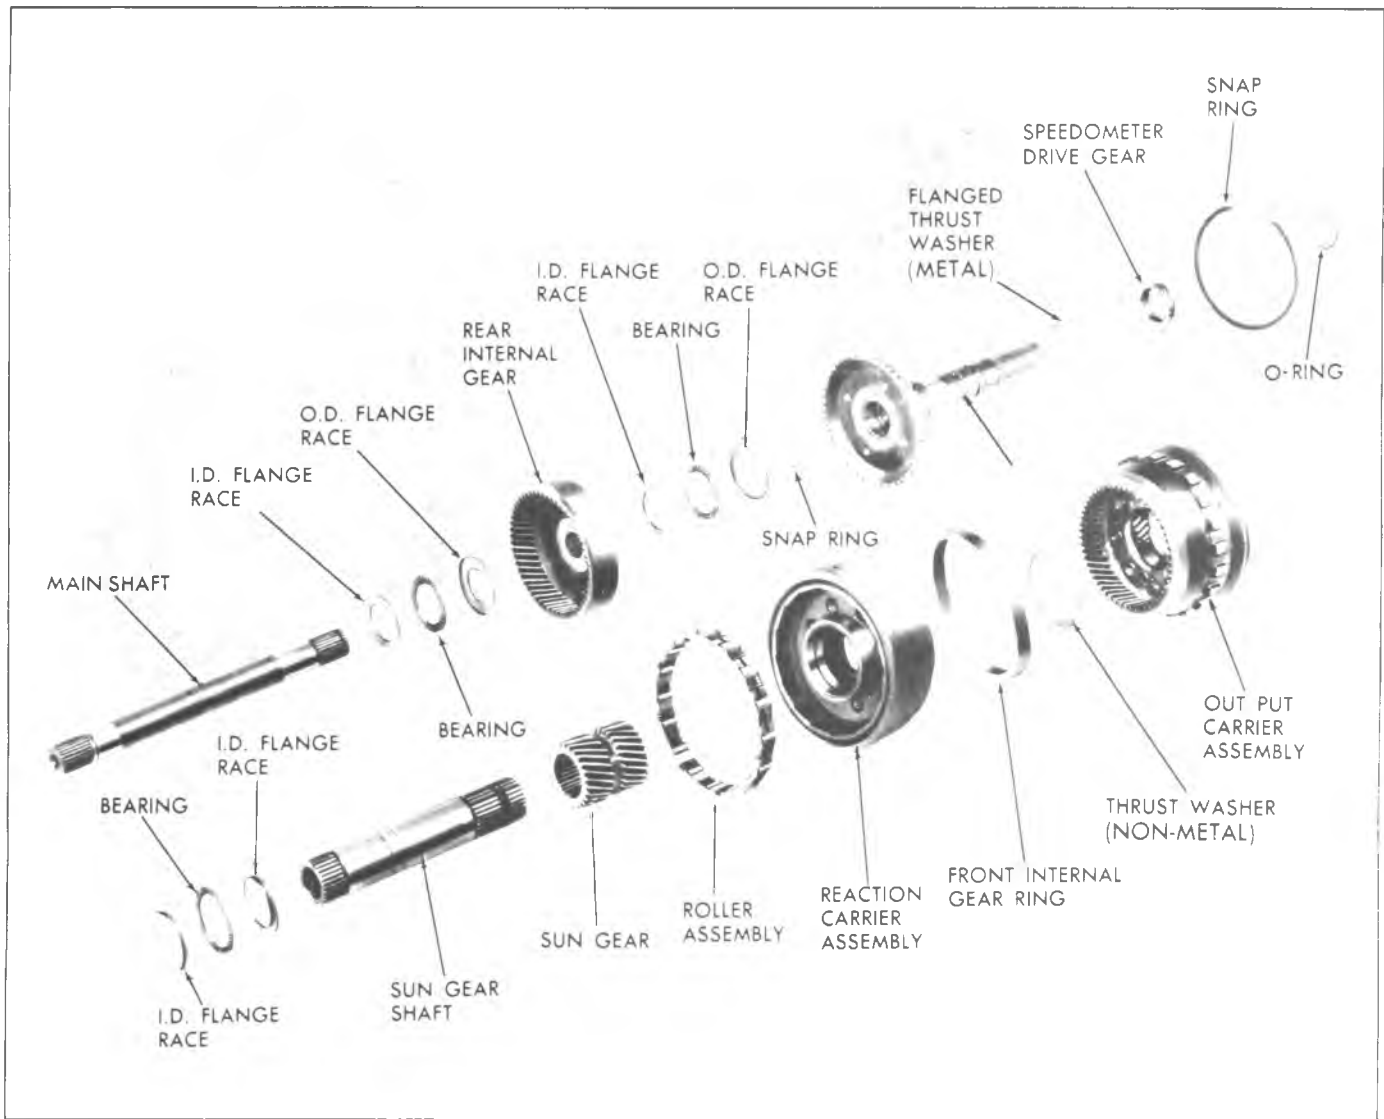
A-141C--Gear Unit Assembly--Exploded View
